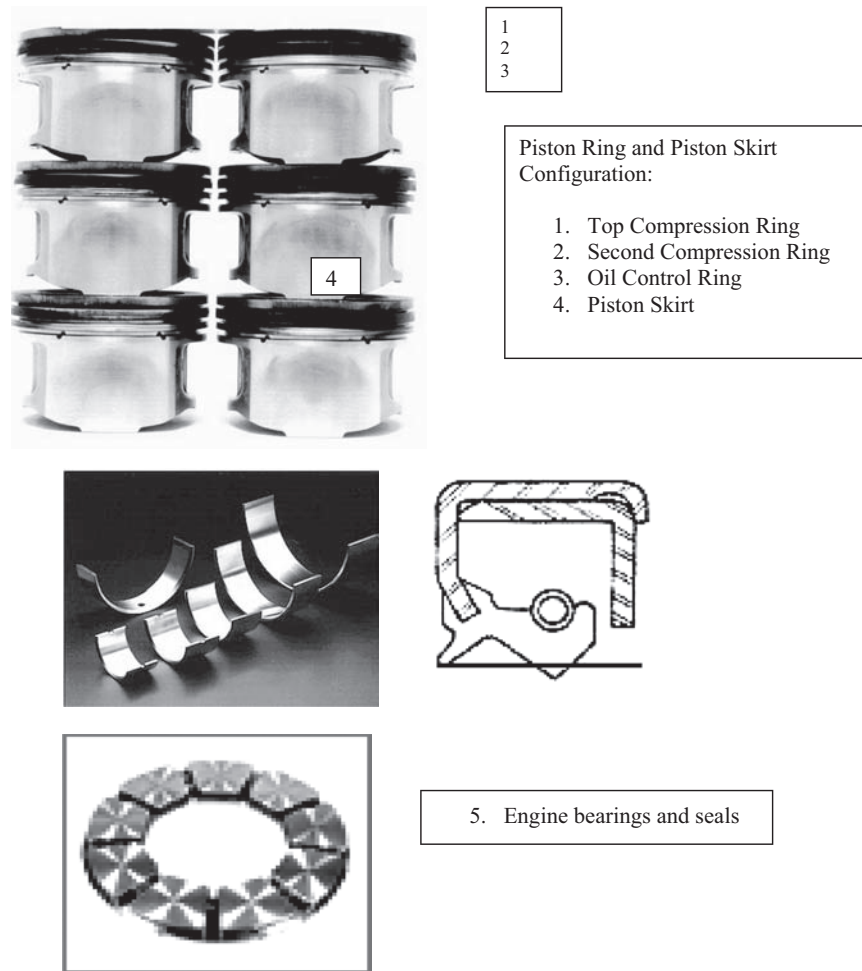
Piston ring, piston skirt, and engine bearing configuration: 1 = top compression ring, 2 = second compression ring, 3 = oil control ring, 4 = piston skirt, and 5 = engine bearings and seals.
